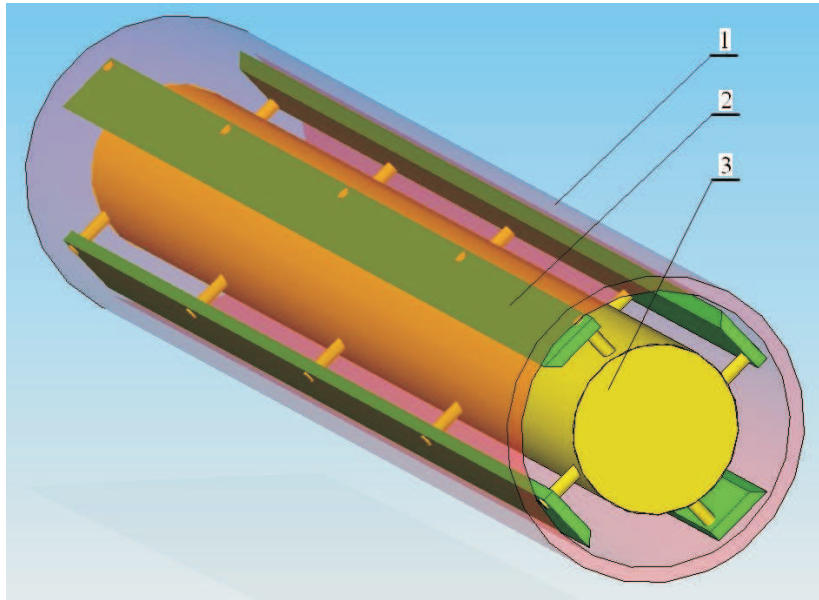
Standard construction of the scraped surface heat exchanger: 1) stator, 2) blade, 3) rotor.
